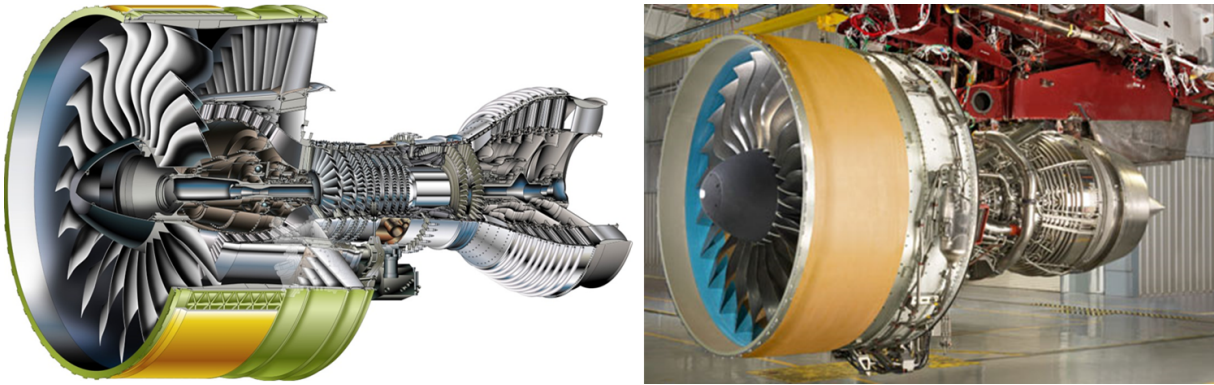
Cut-away view and picture of an assembled GP7000 Turbofan, aircraft engine for the A380 manufactured by MTU and their partners.
